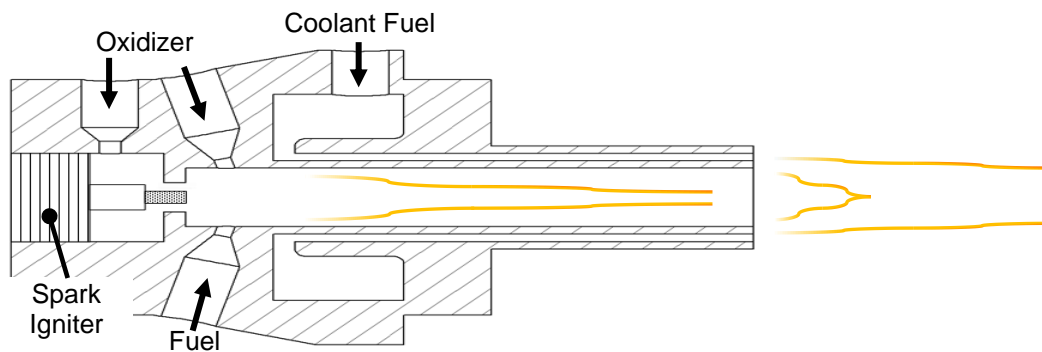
Side-view cut-out example of 3D printed torch igniter
